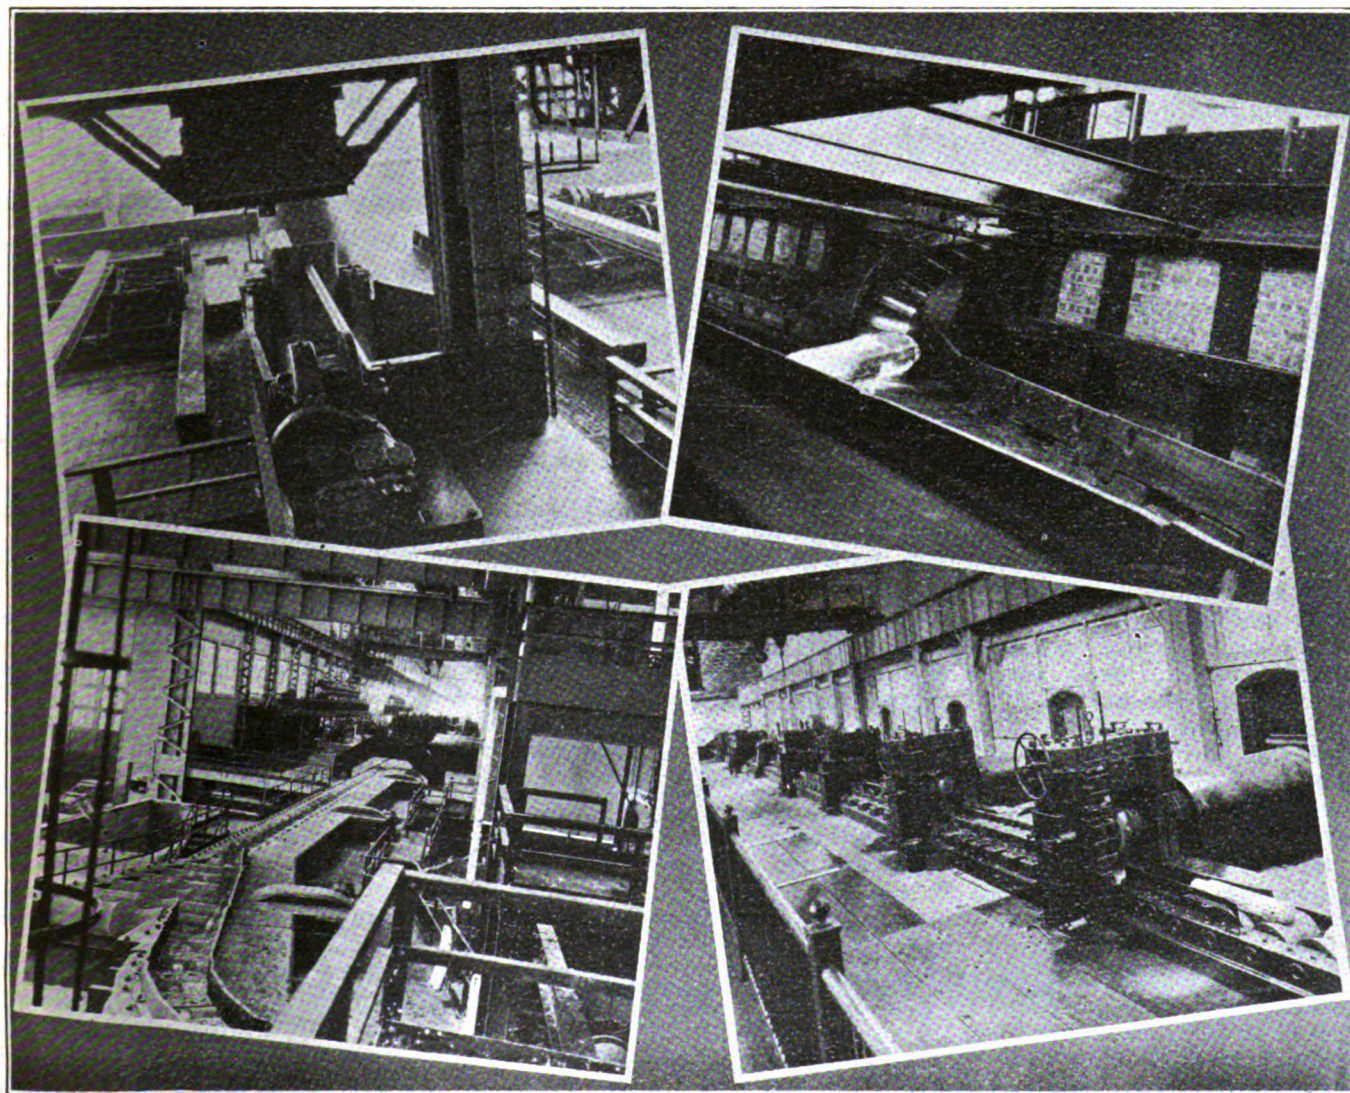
(upper left)—View at soaking pits where ingots enter the chute. FIG. 2 (upper right)—Chute from pits to mill tables. FIG. 3 (lower left)—Conveyor tables from chute to mill. FIG. 4 (lower right)—Ingot entering mill.
